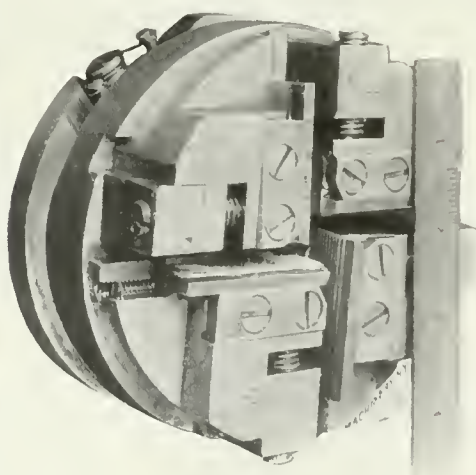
Landis Solid Adjustable Die-head for Automatic Screw Machines, etc.
